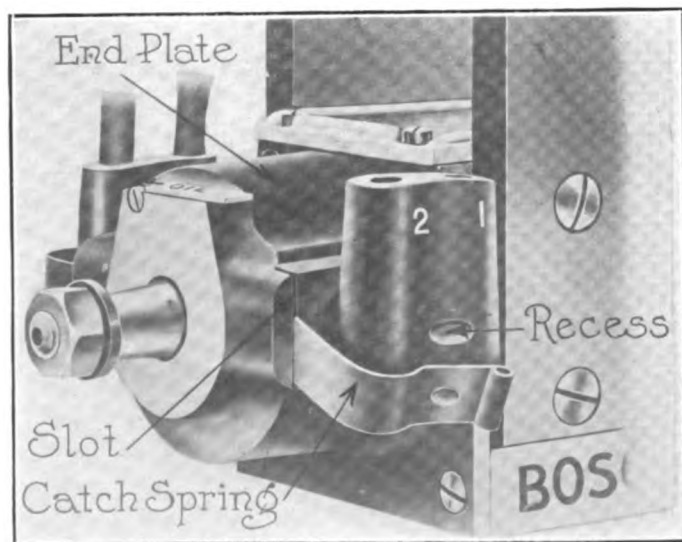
Showing the Marked Brush Holders in Place and the Compactness of the Design.
